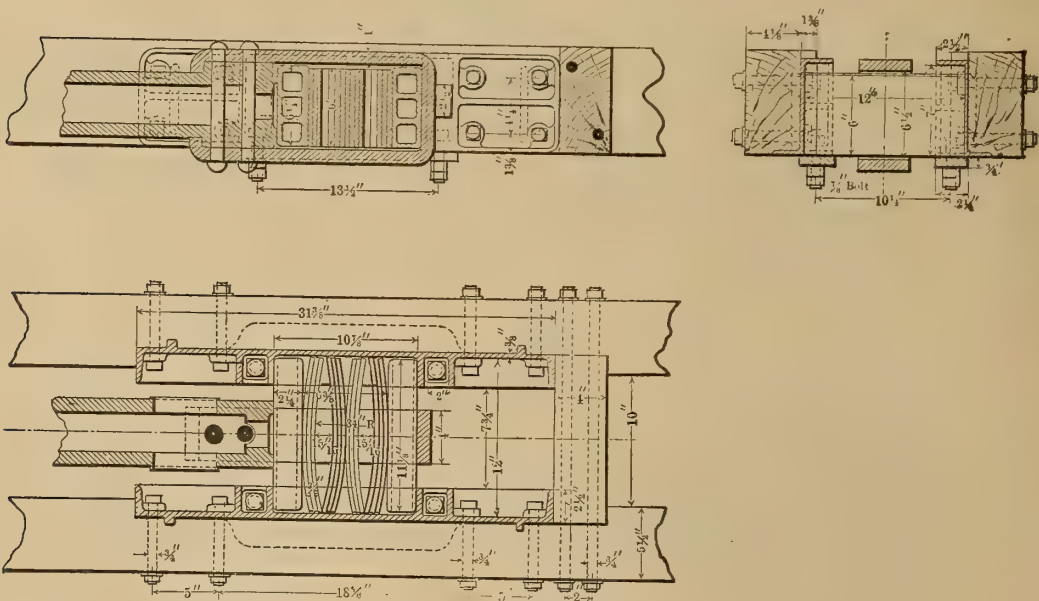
MINER DRAFT GEAR APPLIED TO 80,000 LB. COAL CAR. M., K. & T.,
